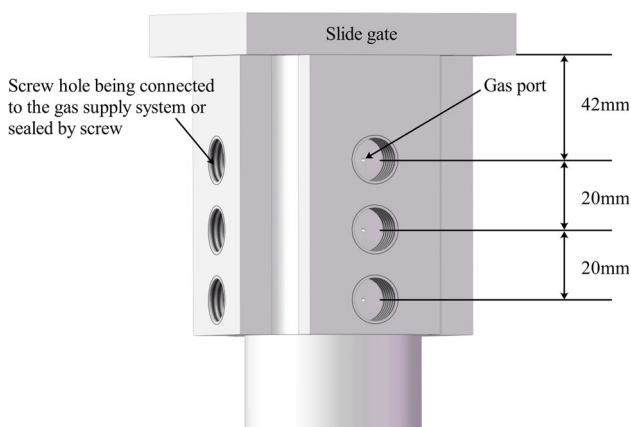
The upper section of the novel ladle shroud with key dimensions (mm).
